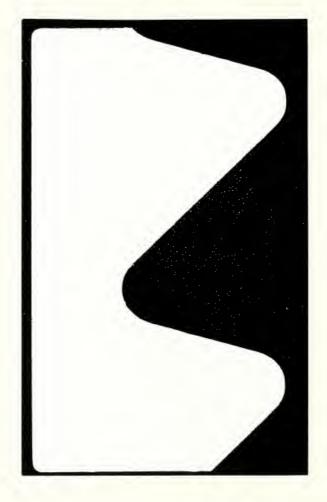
Thread profile of hub socket No. 2 showing two damaged threads adjacent to fracture. X 18
